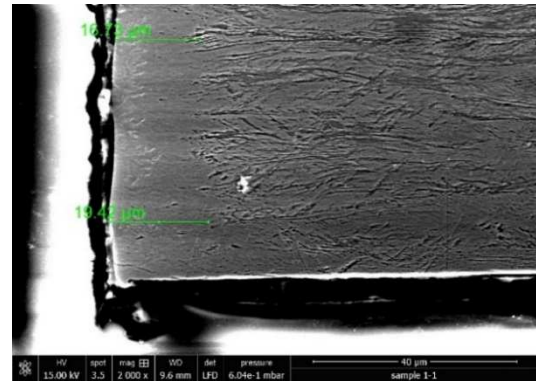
Test 1 sample 1 - 0.4 mm hole HAZ dimension
